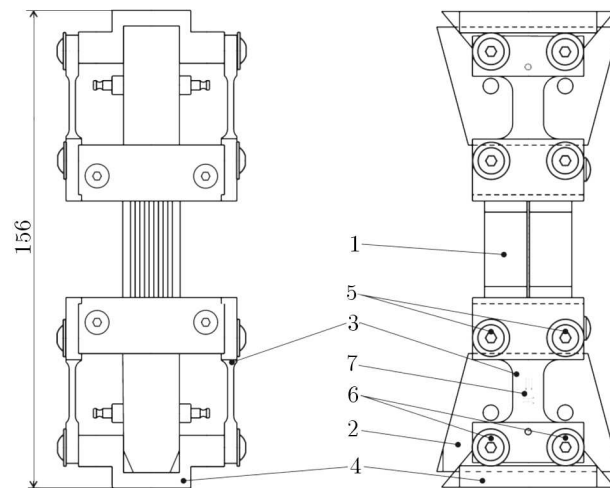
Technical drawing of the fixture and numbered component parts: front and side view
